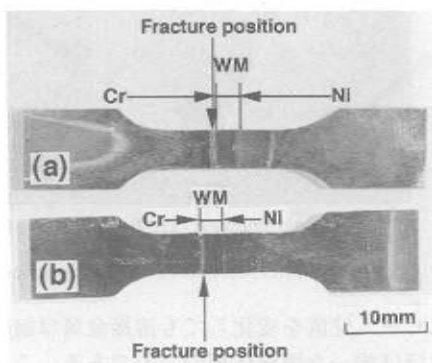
Typical appearance of tensile-tested specimen (Cr/Ni welded joint).
